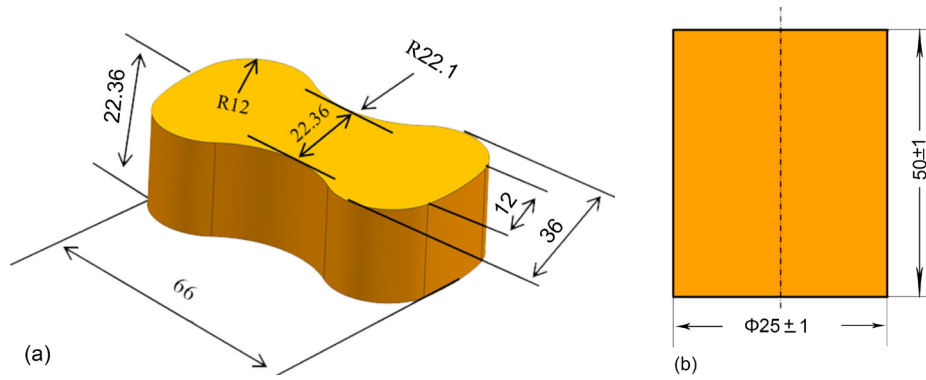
(a) Dimension (mm) of samples for tensile testing, and (b) dimension (mm) of cylindrical samples for compressive testing
